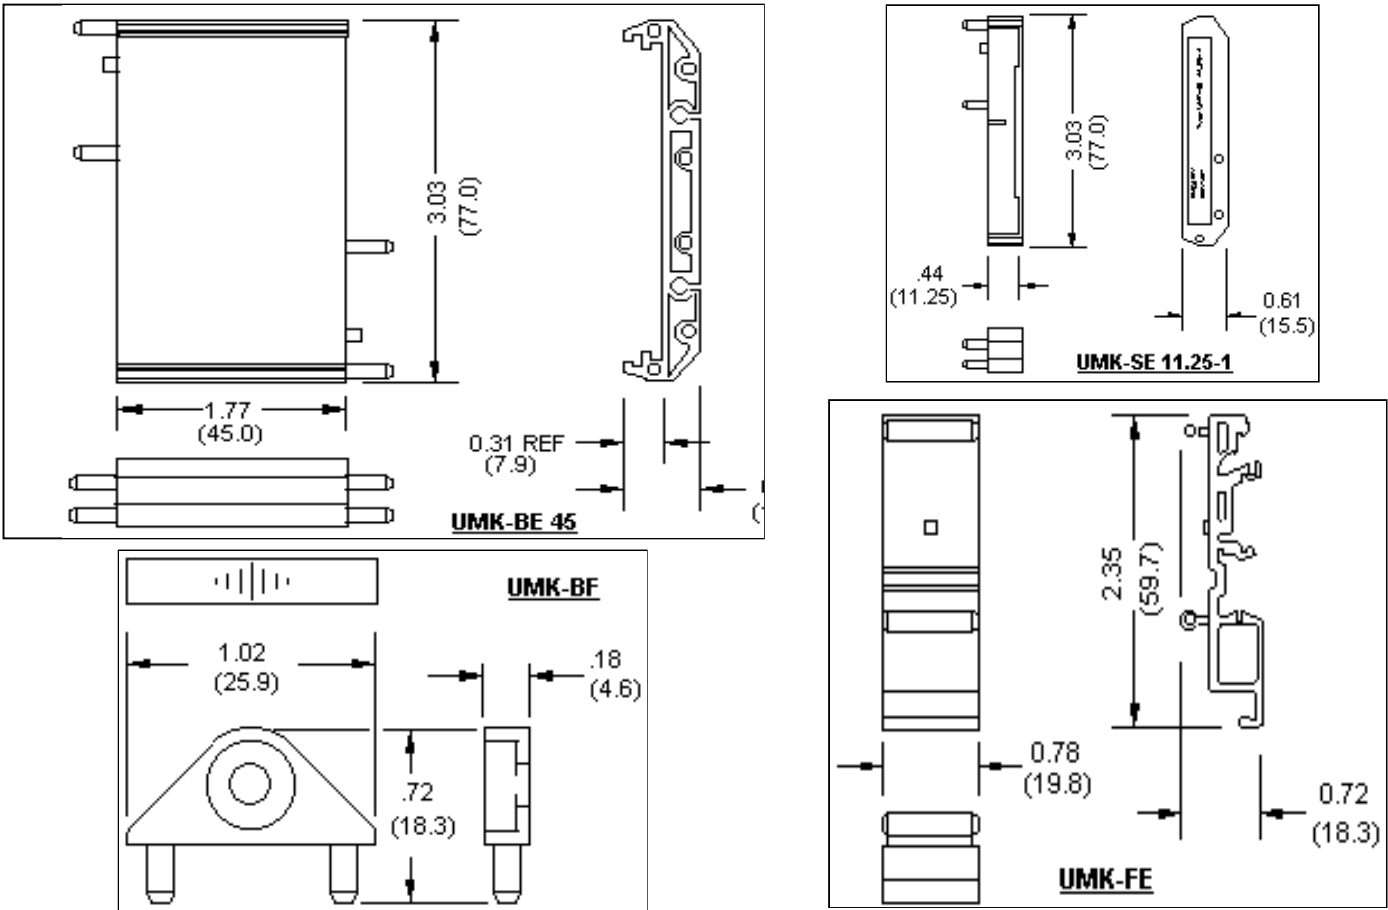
Digital Servo Axis Terminal Board Assembly Drawings
